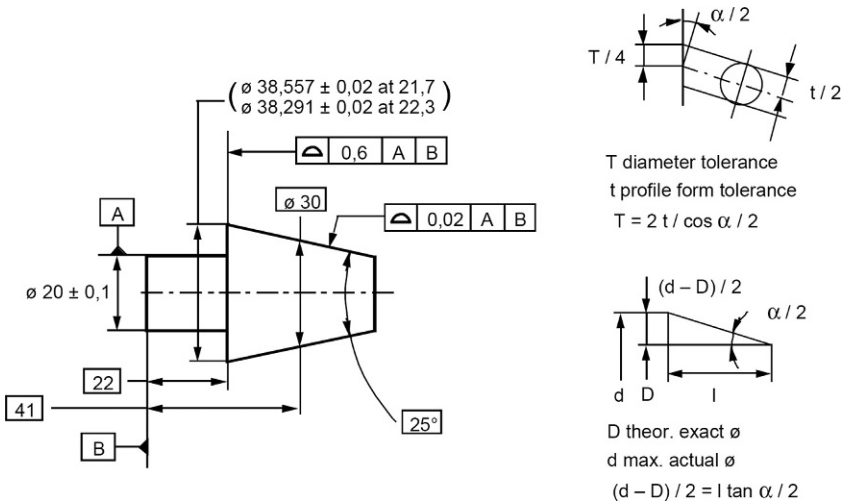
Tolerancing of a cone with auxiliary dimensions for manufacturing purposes
